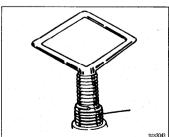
Screw the insert onto the installer tool until the tang engages the slot. Thread the insert into the hole until it is $\frac{1}{4}$ — $\frac{1}{2}$ turn below the top surface, then remove the tool and break off the tang using a punch
